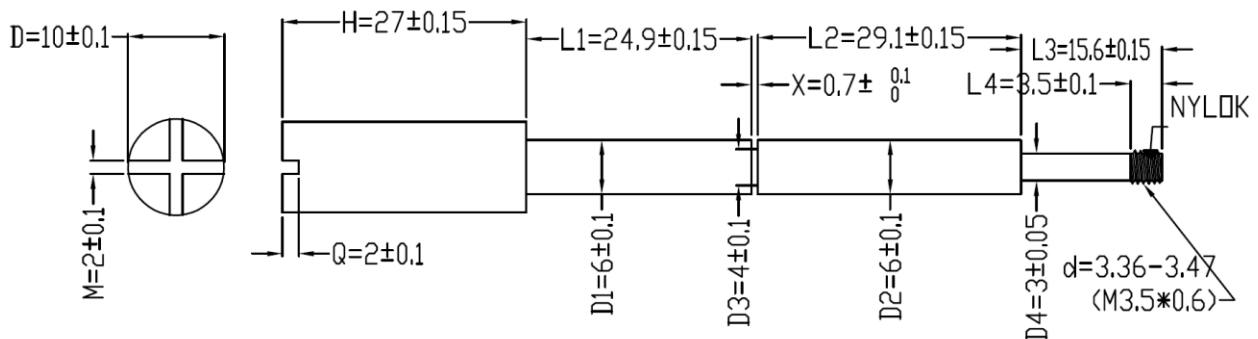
Drawing of Wujiang Screw MDCM0359733N
